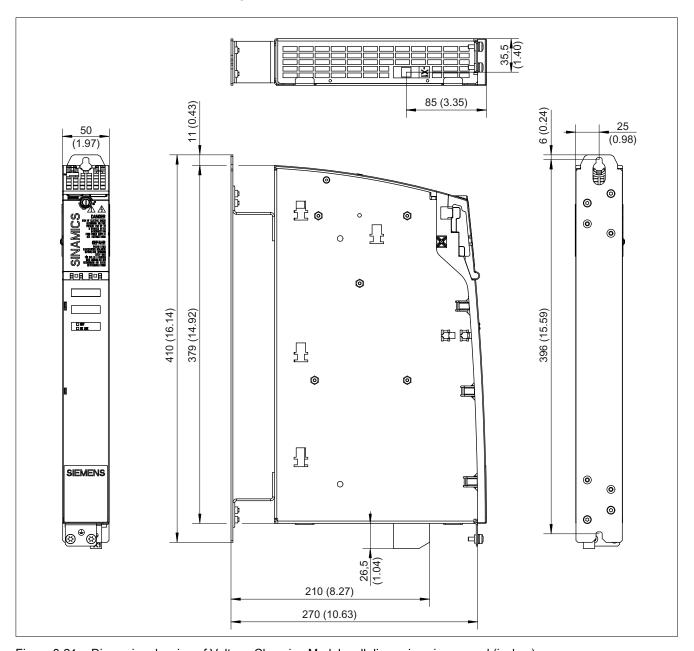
Dimension drawing of Voltage Clamping Module, all dimensions in mm and (inches)
